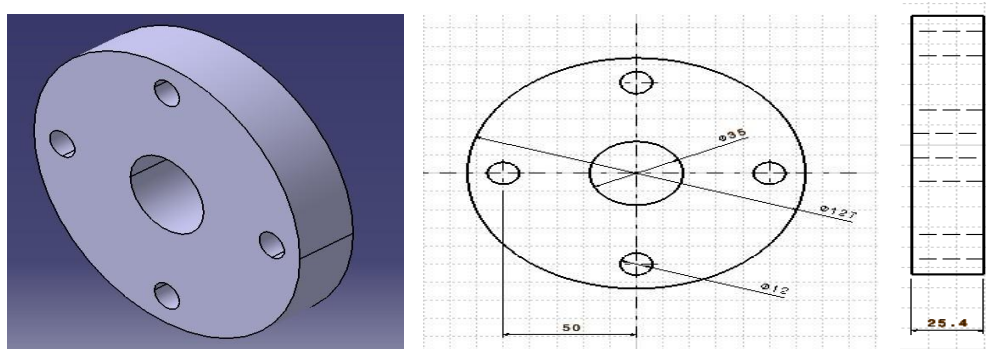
Flywheel Flange (Left); Cross-section of the Flange (in mm, Right)
